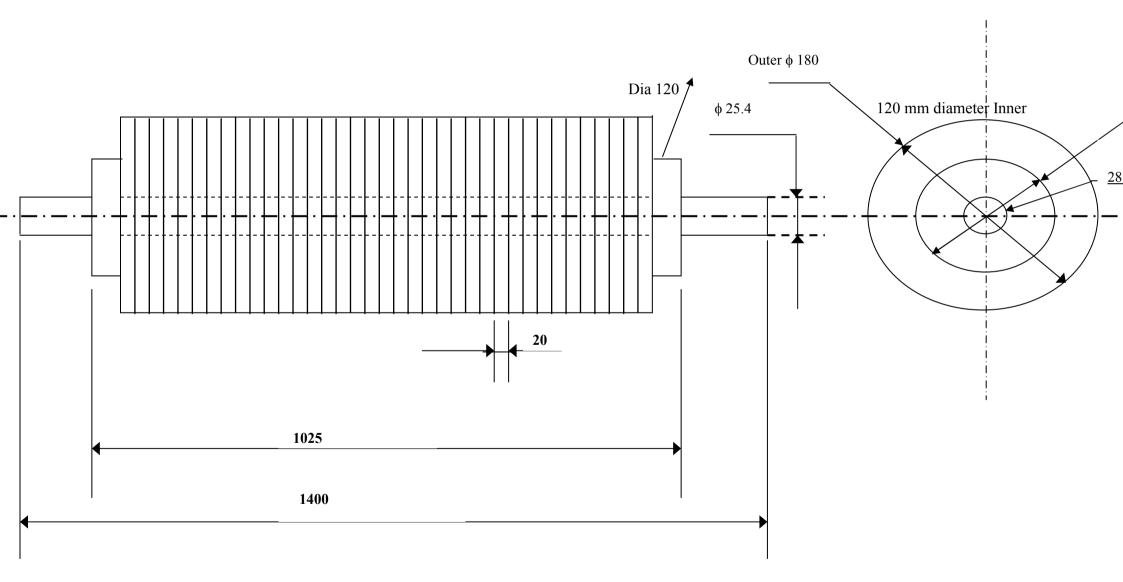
ASSEMBLY DRAWING OF RUBBERIZED COTTON FABRIC (RCF) WASHERS FOR MAKING RCF ROLLERS OF DOUBLE ROLLER GINS
